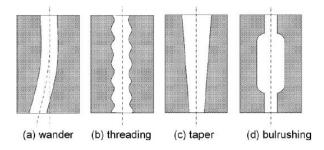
Defects in shaped tube electrolytic machining
